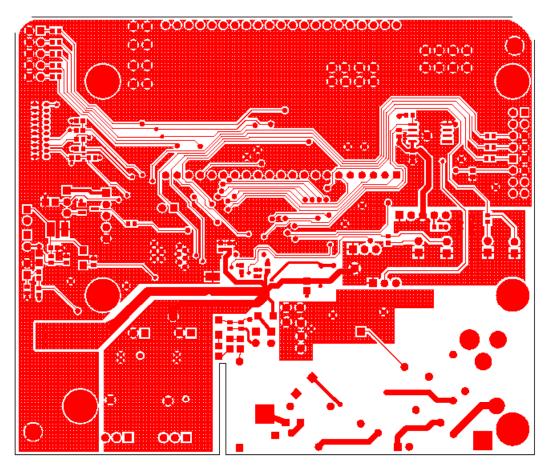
71M6511 2-Layer Demo Board (Xformer Power Supply): Bottom Copper View
